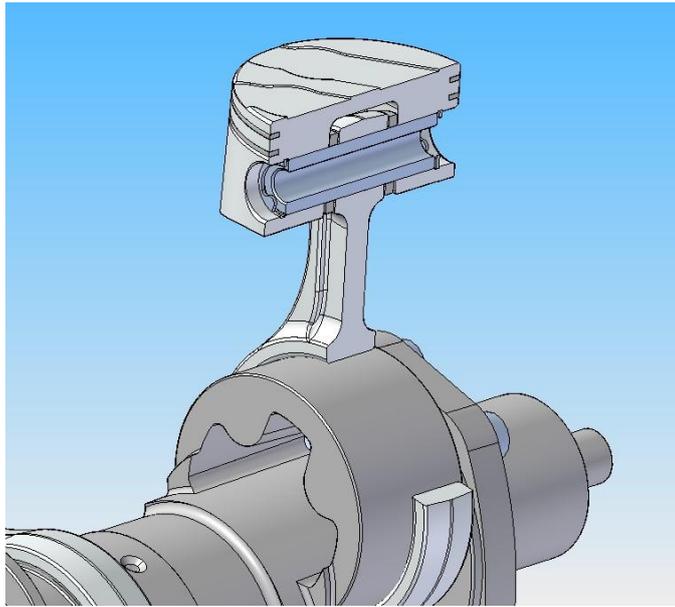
Connecting rod for compressor models PP2-L/Hxxxx, PP4-L/Hxxxx, PP4-L/HNxxxx
